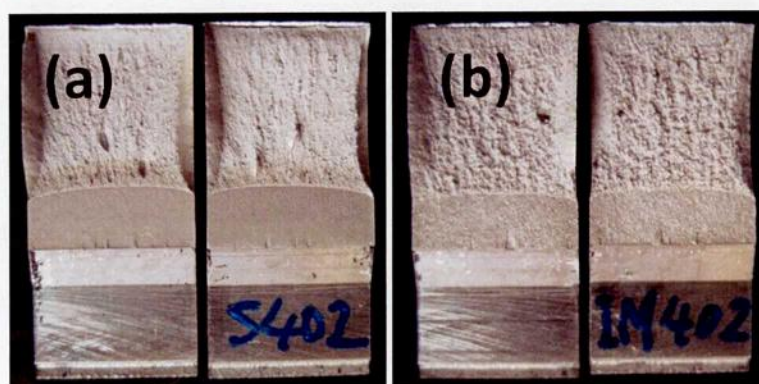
Macrographs for fracture surfaces for fracture toughness 3-point bending test samples extruded at 673 K for both SWAP powder (a) and cast billet (b).
